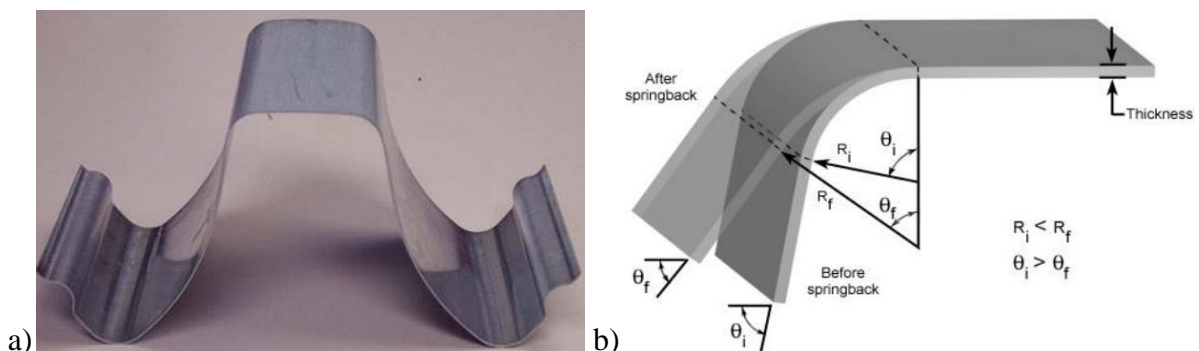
a) Springback of DP600 channel draw, b) Elastic strain recovery after the tooling is removed called Springback phenomenon [WAG 2006].
